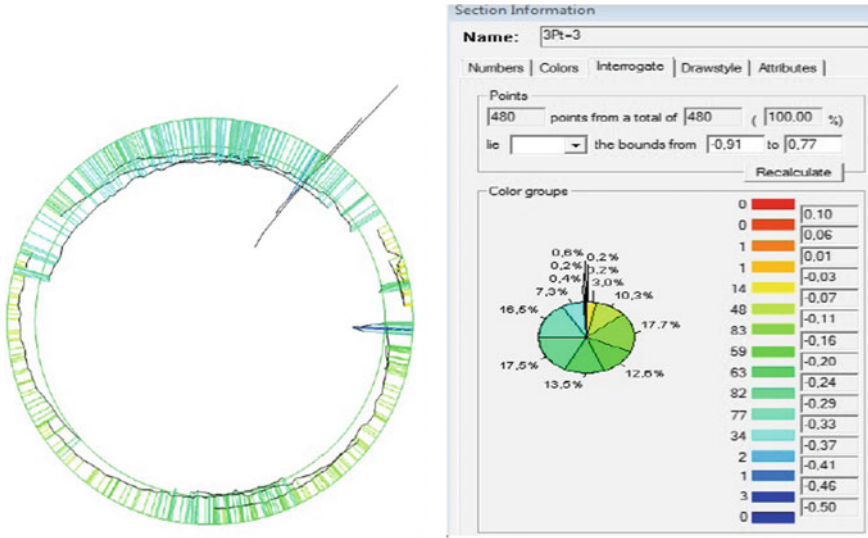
Chromatic map of deviations of the connector fabricated using machining on the milling machine, including 6 representative points
